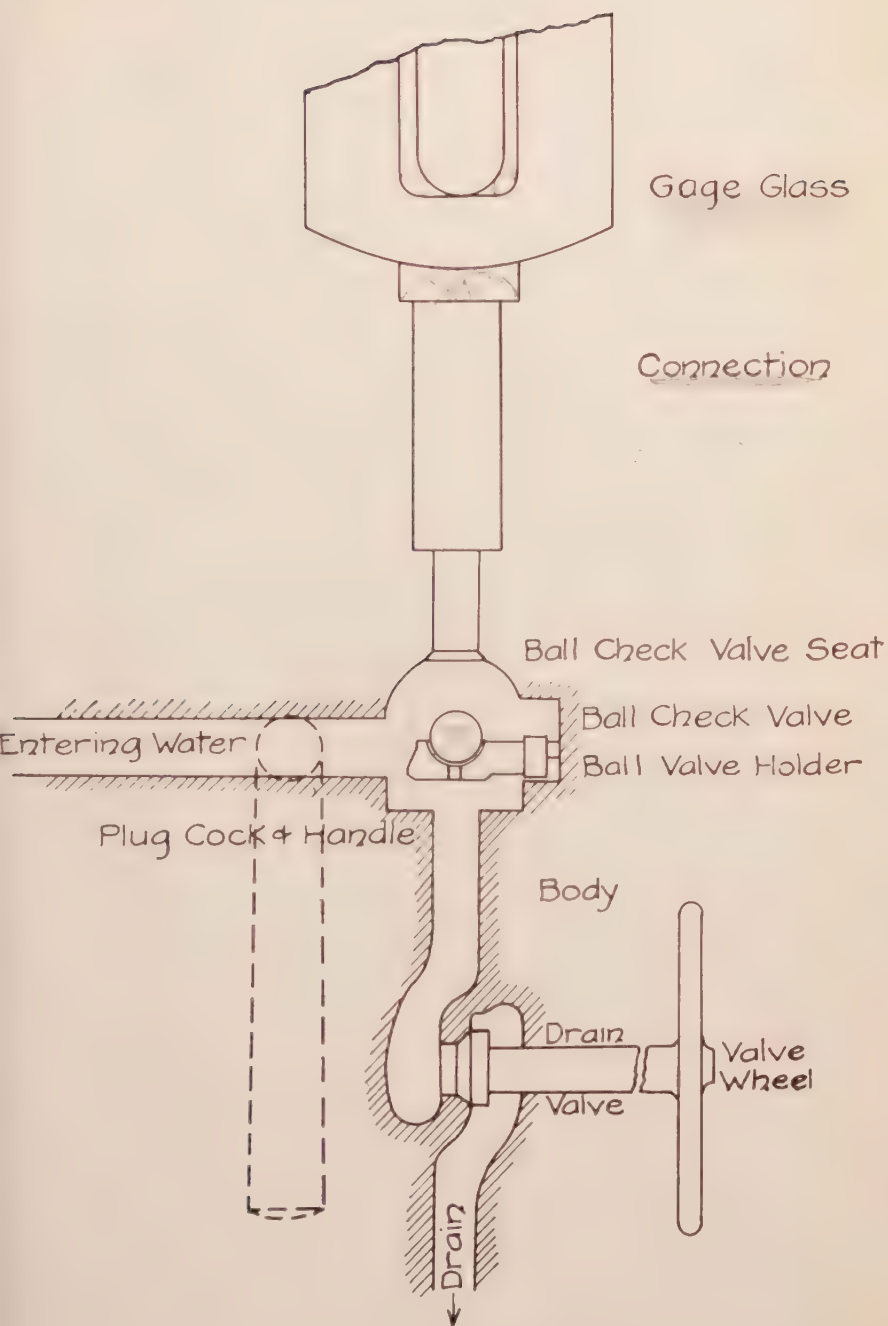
Dewrance Water-Gage Fitting Assembly.
